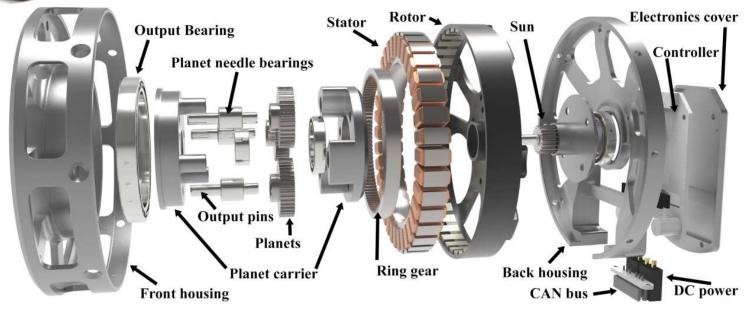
The modular actuator used in the Mini Cheetah. Motor, planetary gear set, and control electronics are all built-in.
